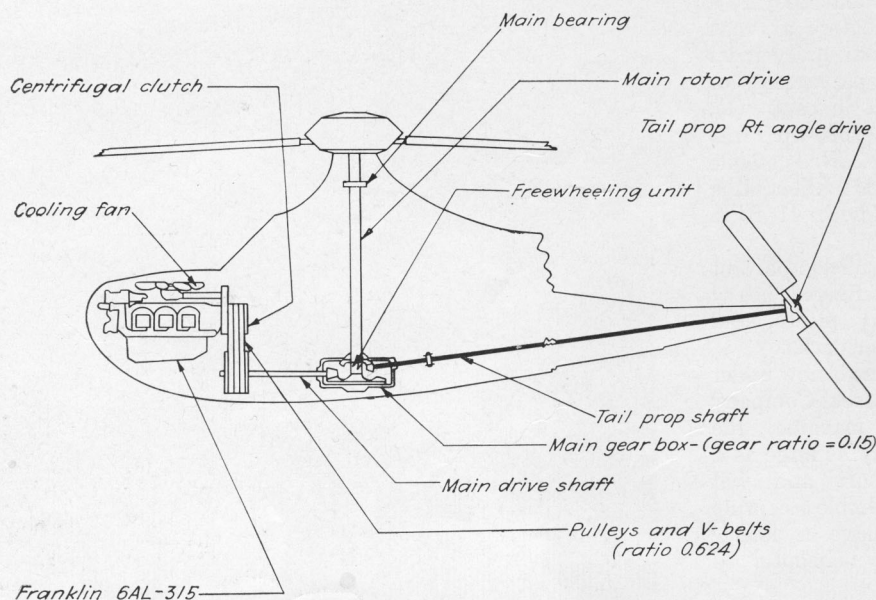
The simplicity of the helicopter drive system is clearly shown in this view. The multiple-belt drive from engine to gearbox and belt-driven cooling fan are disclosed. Bevel gears in an aluminum housing at the tail drive the torque-resisting propeller.
